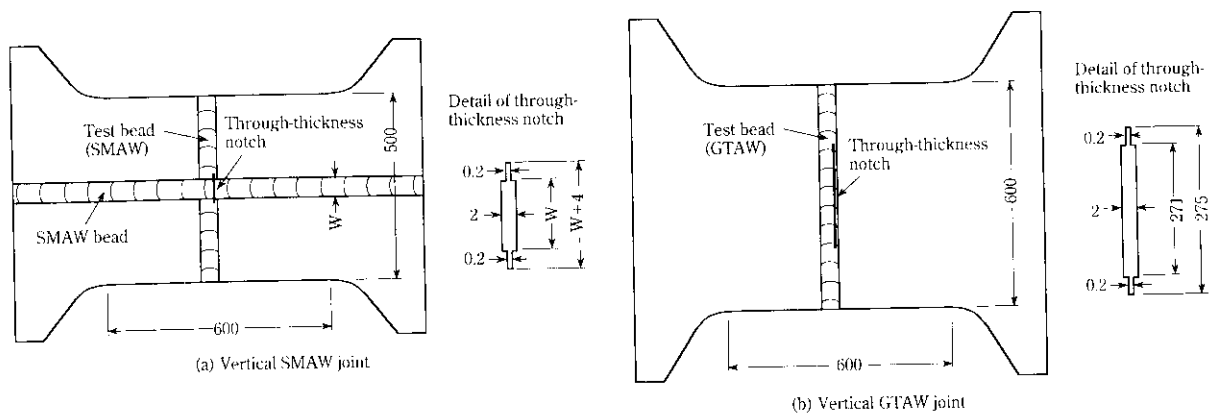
Geometries of wide plate tensile test specimens of welded joints
